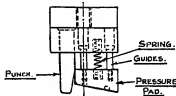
The type of tool recommended to bend the component, Fig. 9
